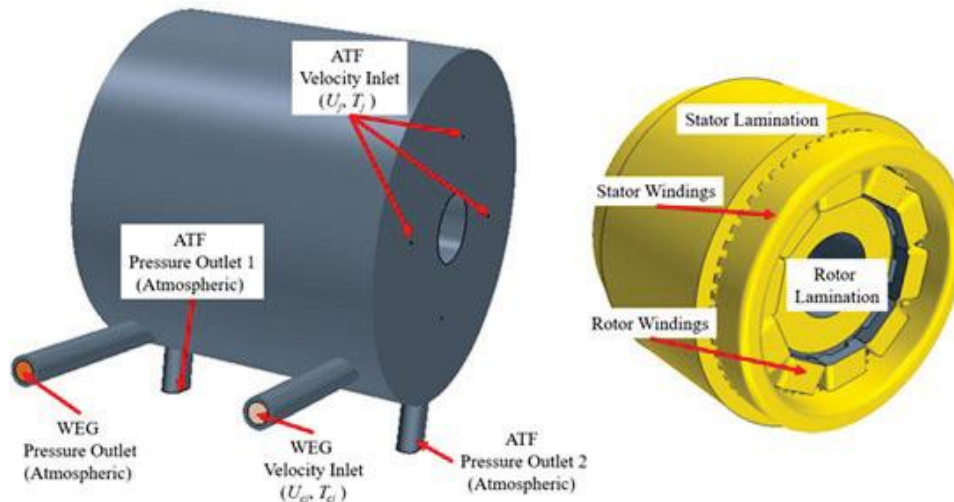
Pictures showing various CAD parts of the motor, coolant inlets and outlets
